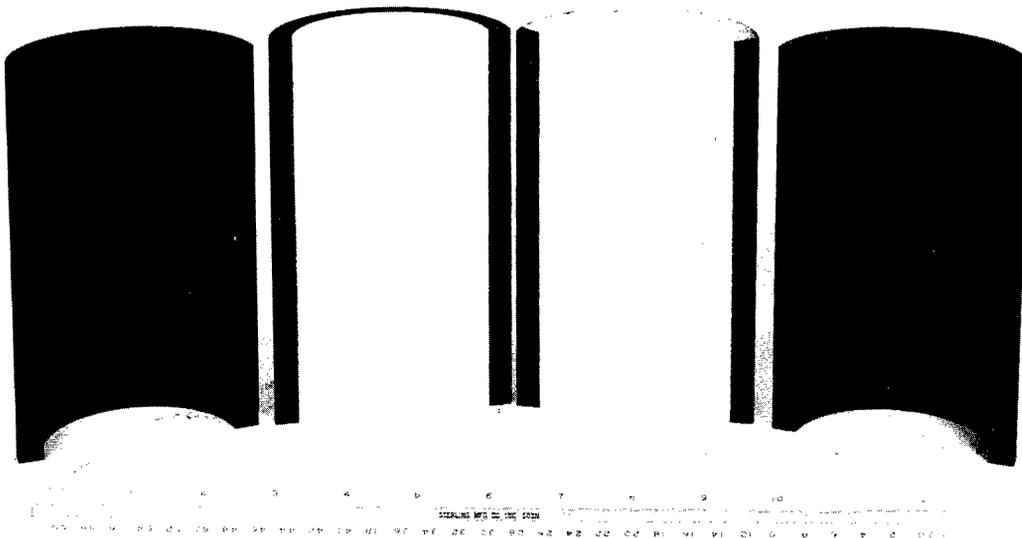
Example of CaZrO_3 coating on graphite mold inserts (left to right: insert 37(a), uncoated; insert 39(b), coated with CaZrO_3 ; insert 39(a), coated with CaZrO_3 ; and insert 37(b), uncoated)
